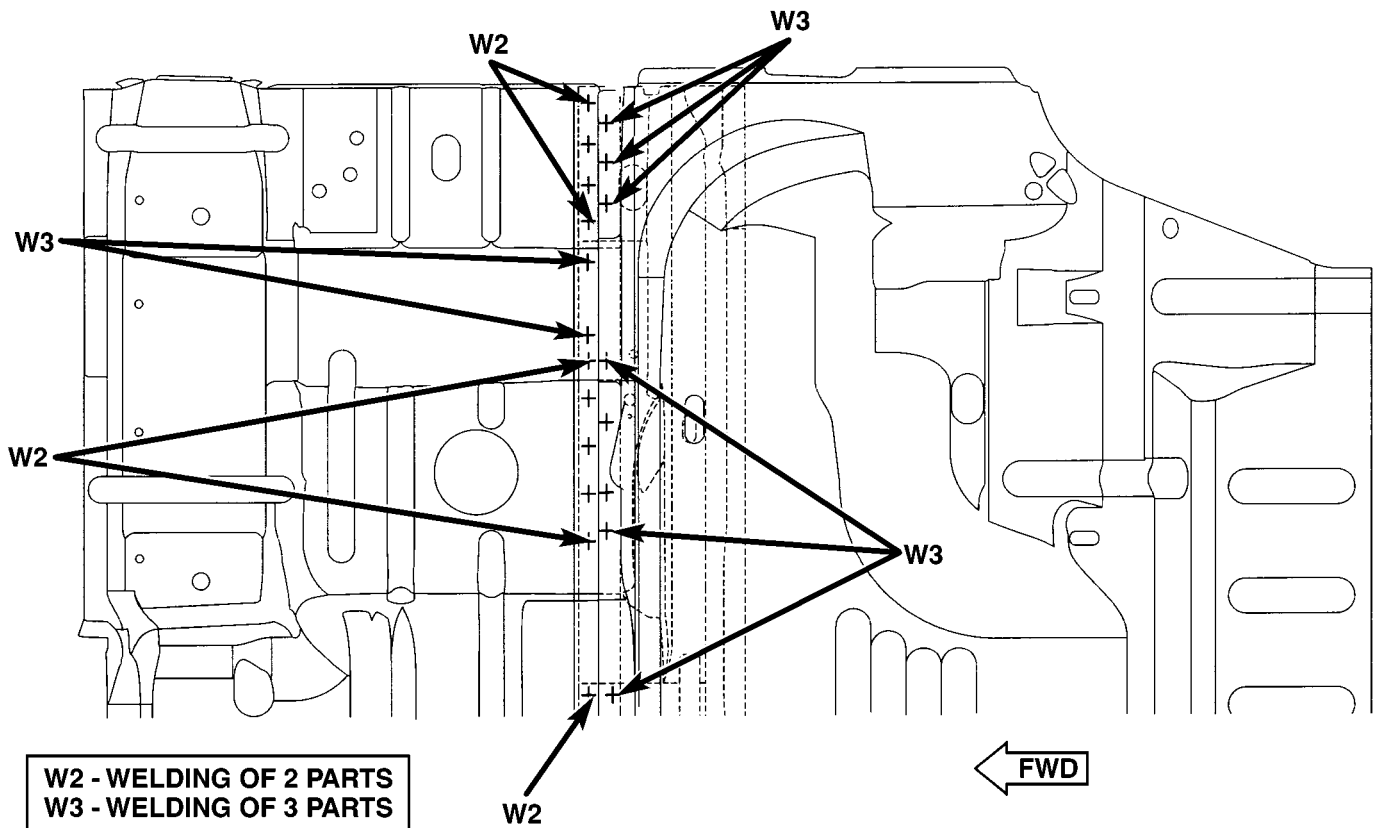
REAR FLOOR PAN FRONT CROSSMEMBER TO REAR FLOOR PAN TO FRONT FLOOR PAN
